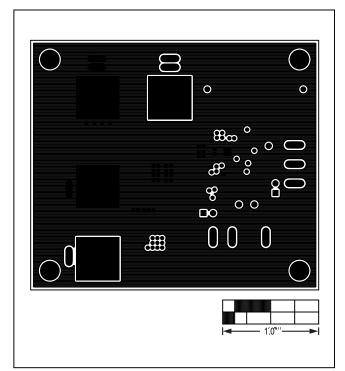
MAX16962R EV Kit PCB Layout—Solder Side
